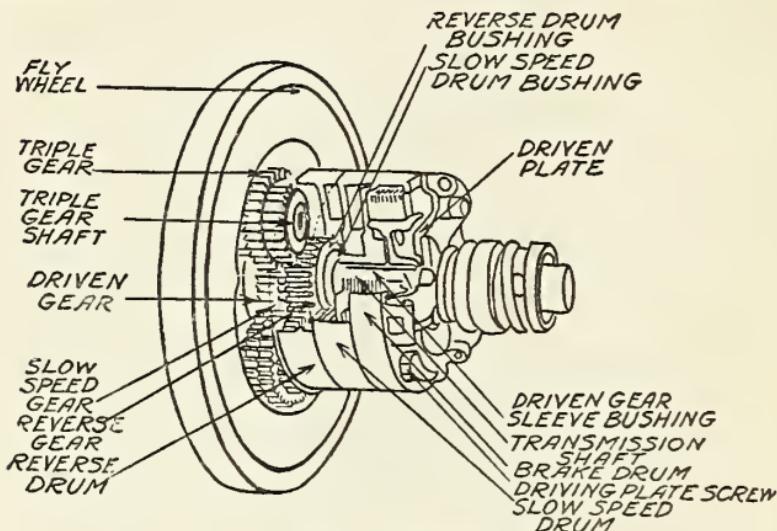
B. Planetary gear transmission used on the Ford Car.
